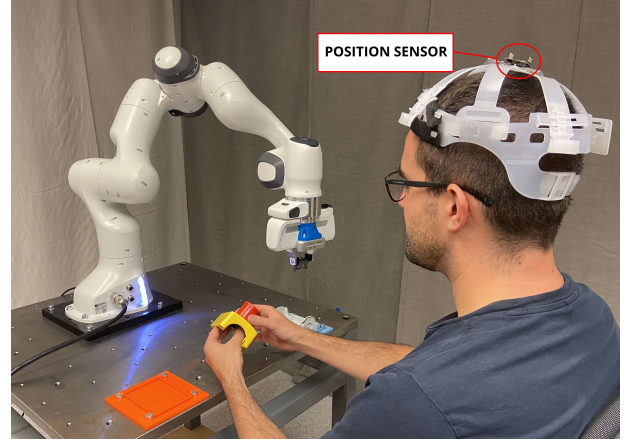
Experimental setup for the collaborative assembly of an emergency button.
